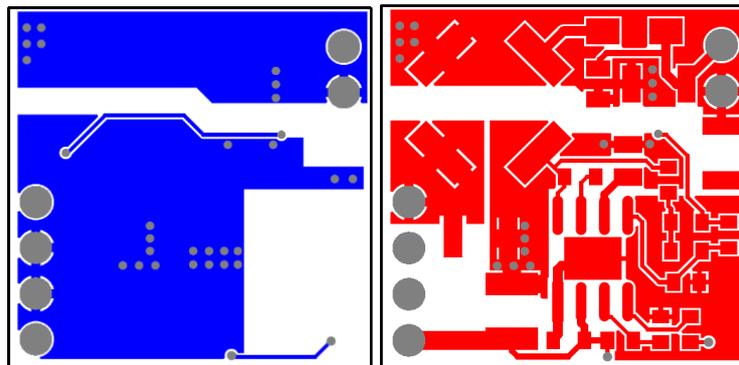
RD006 PCB Layout: top layer route (left), bottom layer route (right) (both top view)
